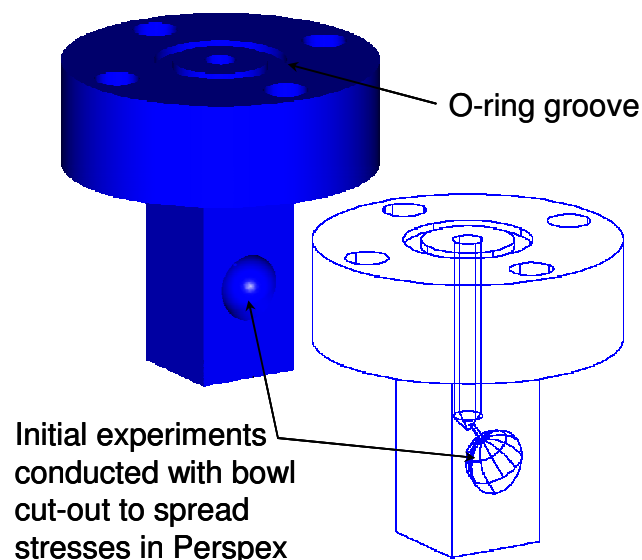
Initial Optical Nozzle Design Showing Bowl Cut-Out
